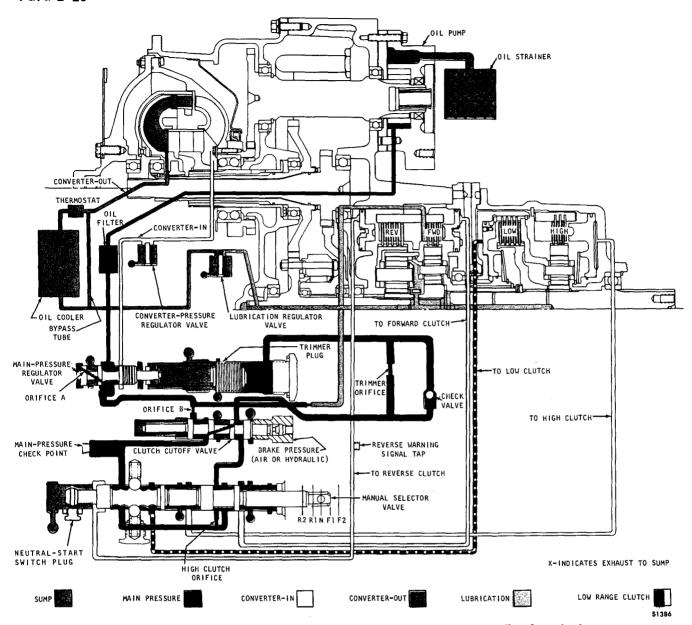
TRT 2221-3 hydraulic system for overdrive model with clutch cutoff-schematic view
